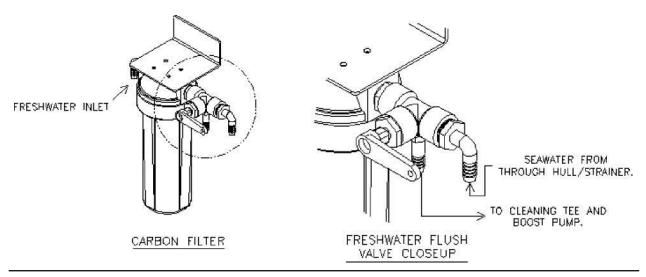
Carbon Filter with Freshwater Flush Valve - Isometric Views.
